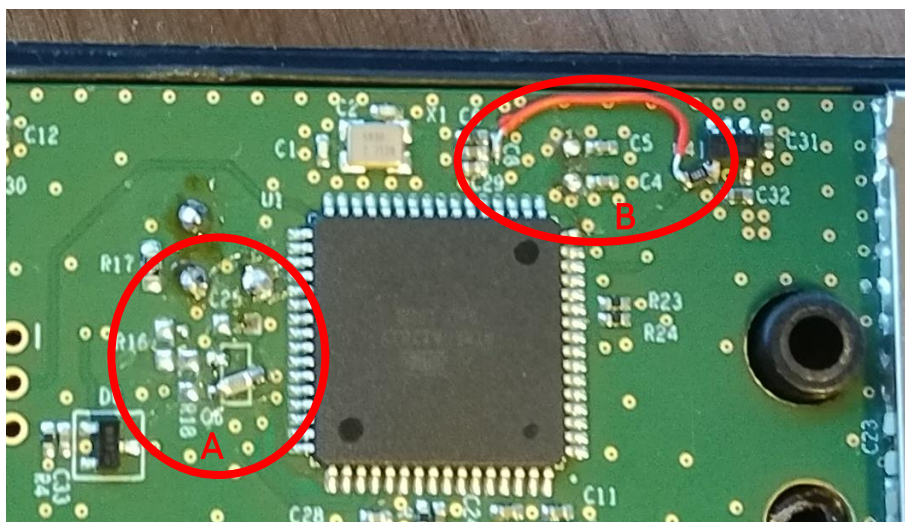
Shows the modifications done on PCB. A) Q6 (FET), C25, R16 and R18 Removed, Ohms resistor inserted between drain and source. B) 3.3V supply wire added to 510k ohm pull up. See document "13 Smart Eye Schem.pdf" for schematic of modification
